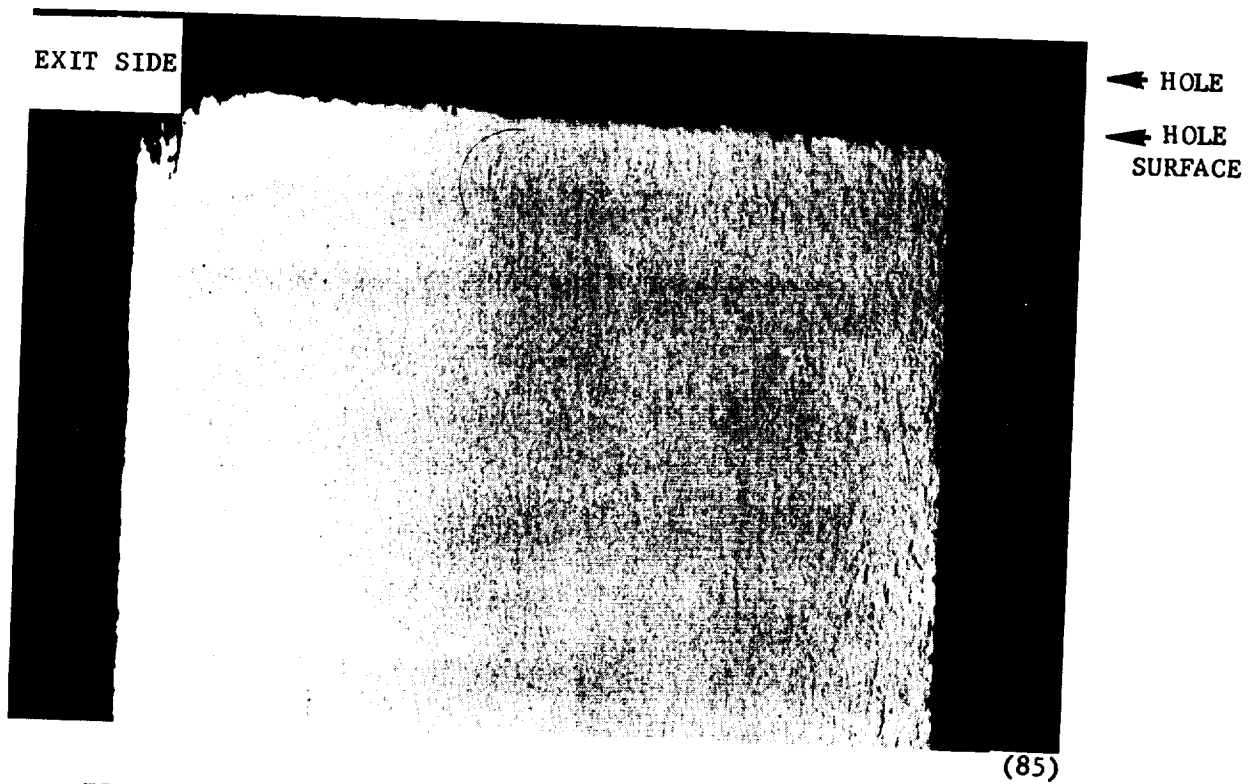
CROSS-SECTION OF HOLE DRILLED WITH DULL DRILL (UNETCHED)
